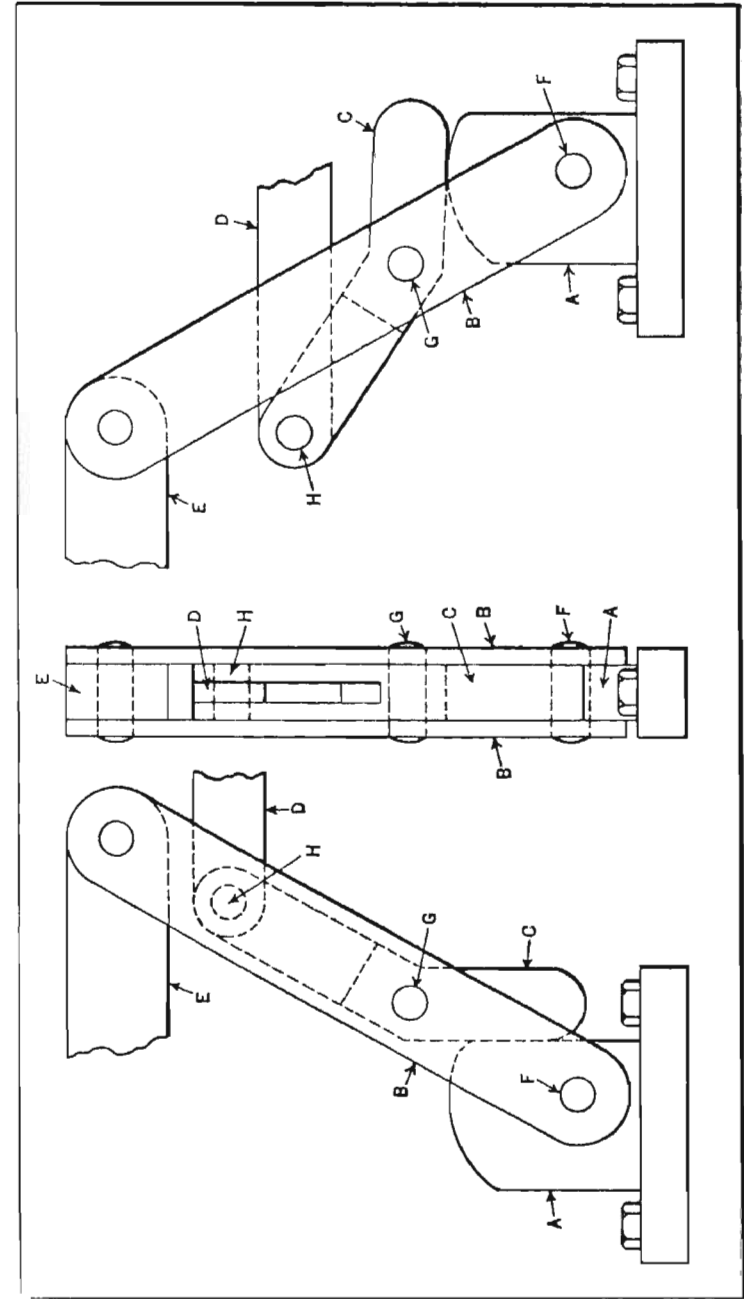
Quick-acting Cam-and-lever Mechanism for Operating Brake-shoe
